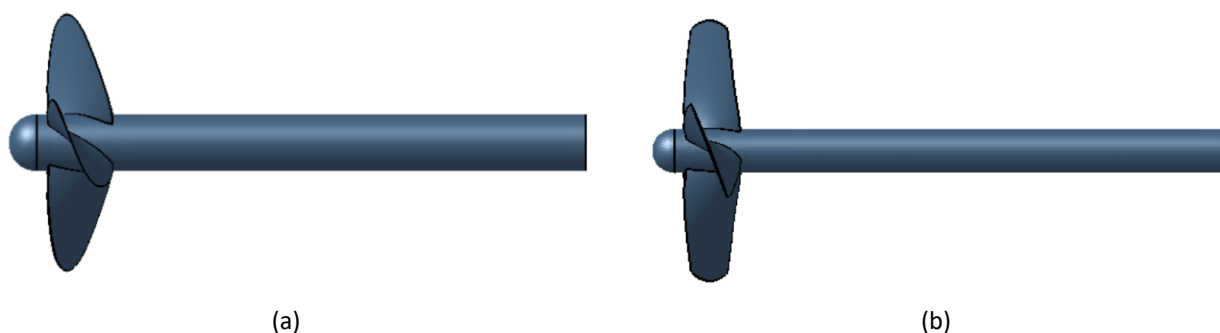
Type of propeller: (a) Open propeller B4-70, (b) Open propeller Ka4-70
